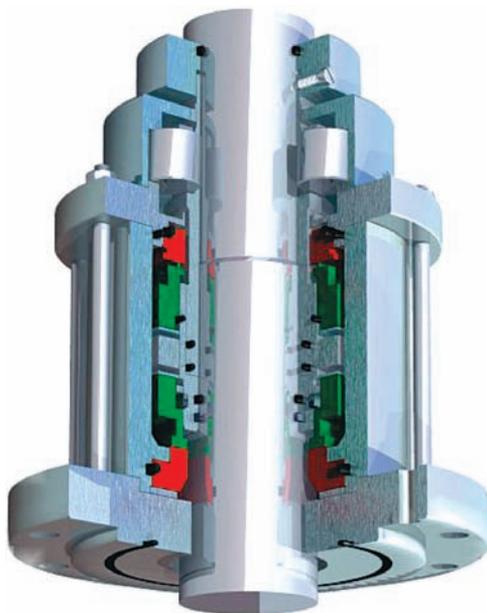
Typical double mechanical seal (Courtesy of John Crane UK Ltd)
